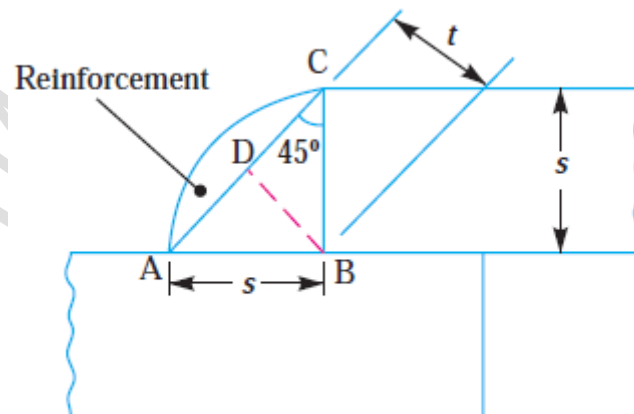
Enlarged view of a fillet weld.
